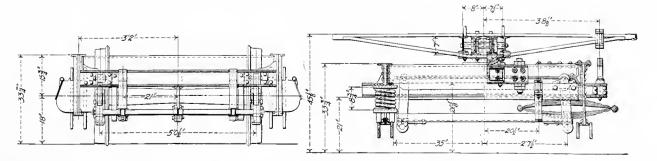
Plan, Side and End Elevations of Pullman Standard Four-Wheel Passenger Truck, No. 104. Pullman Co.
